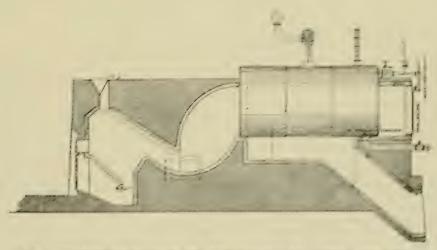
MULTITUBULAR BOILER WITH IMPROVED BAGASSE FURNACE AND STEP-LADDER GRATE. (Herrey Engineering Co.)
